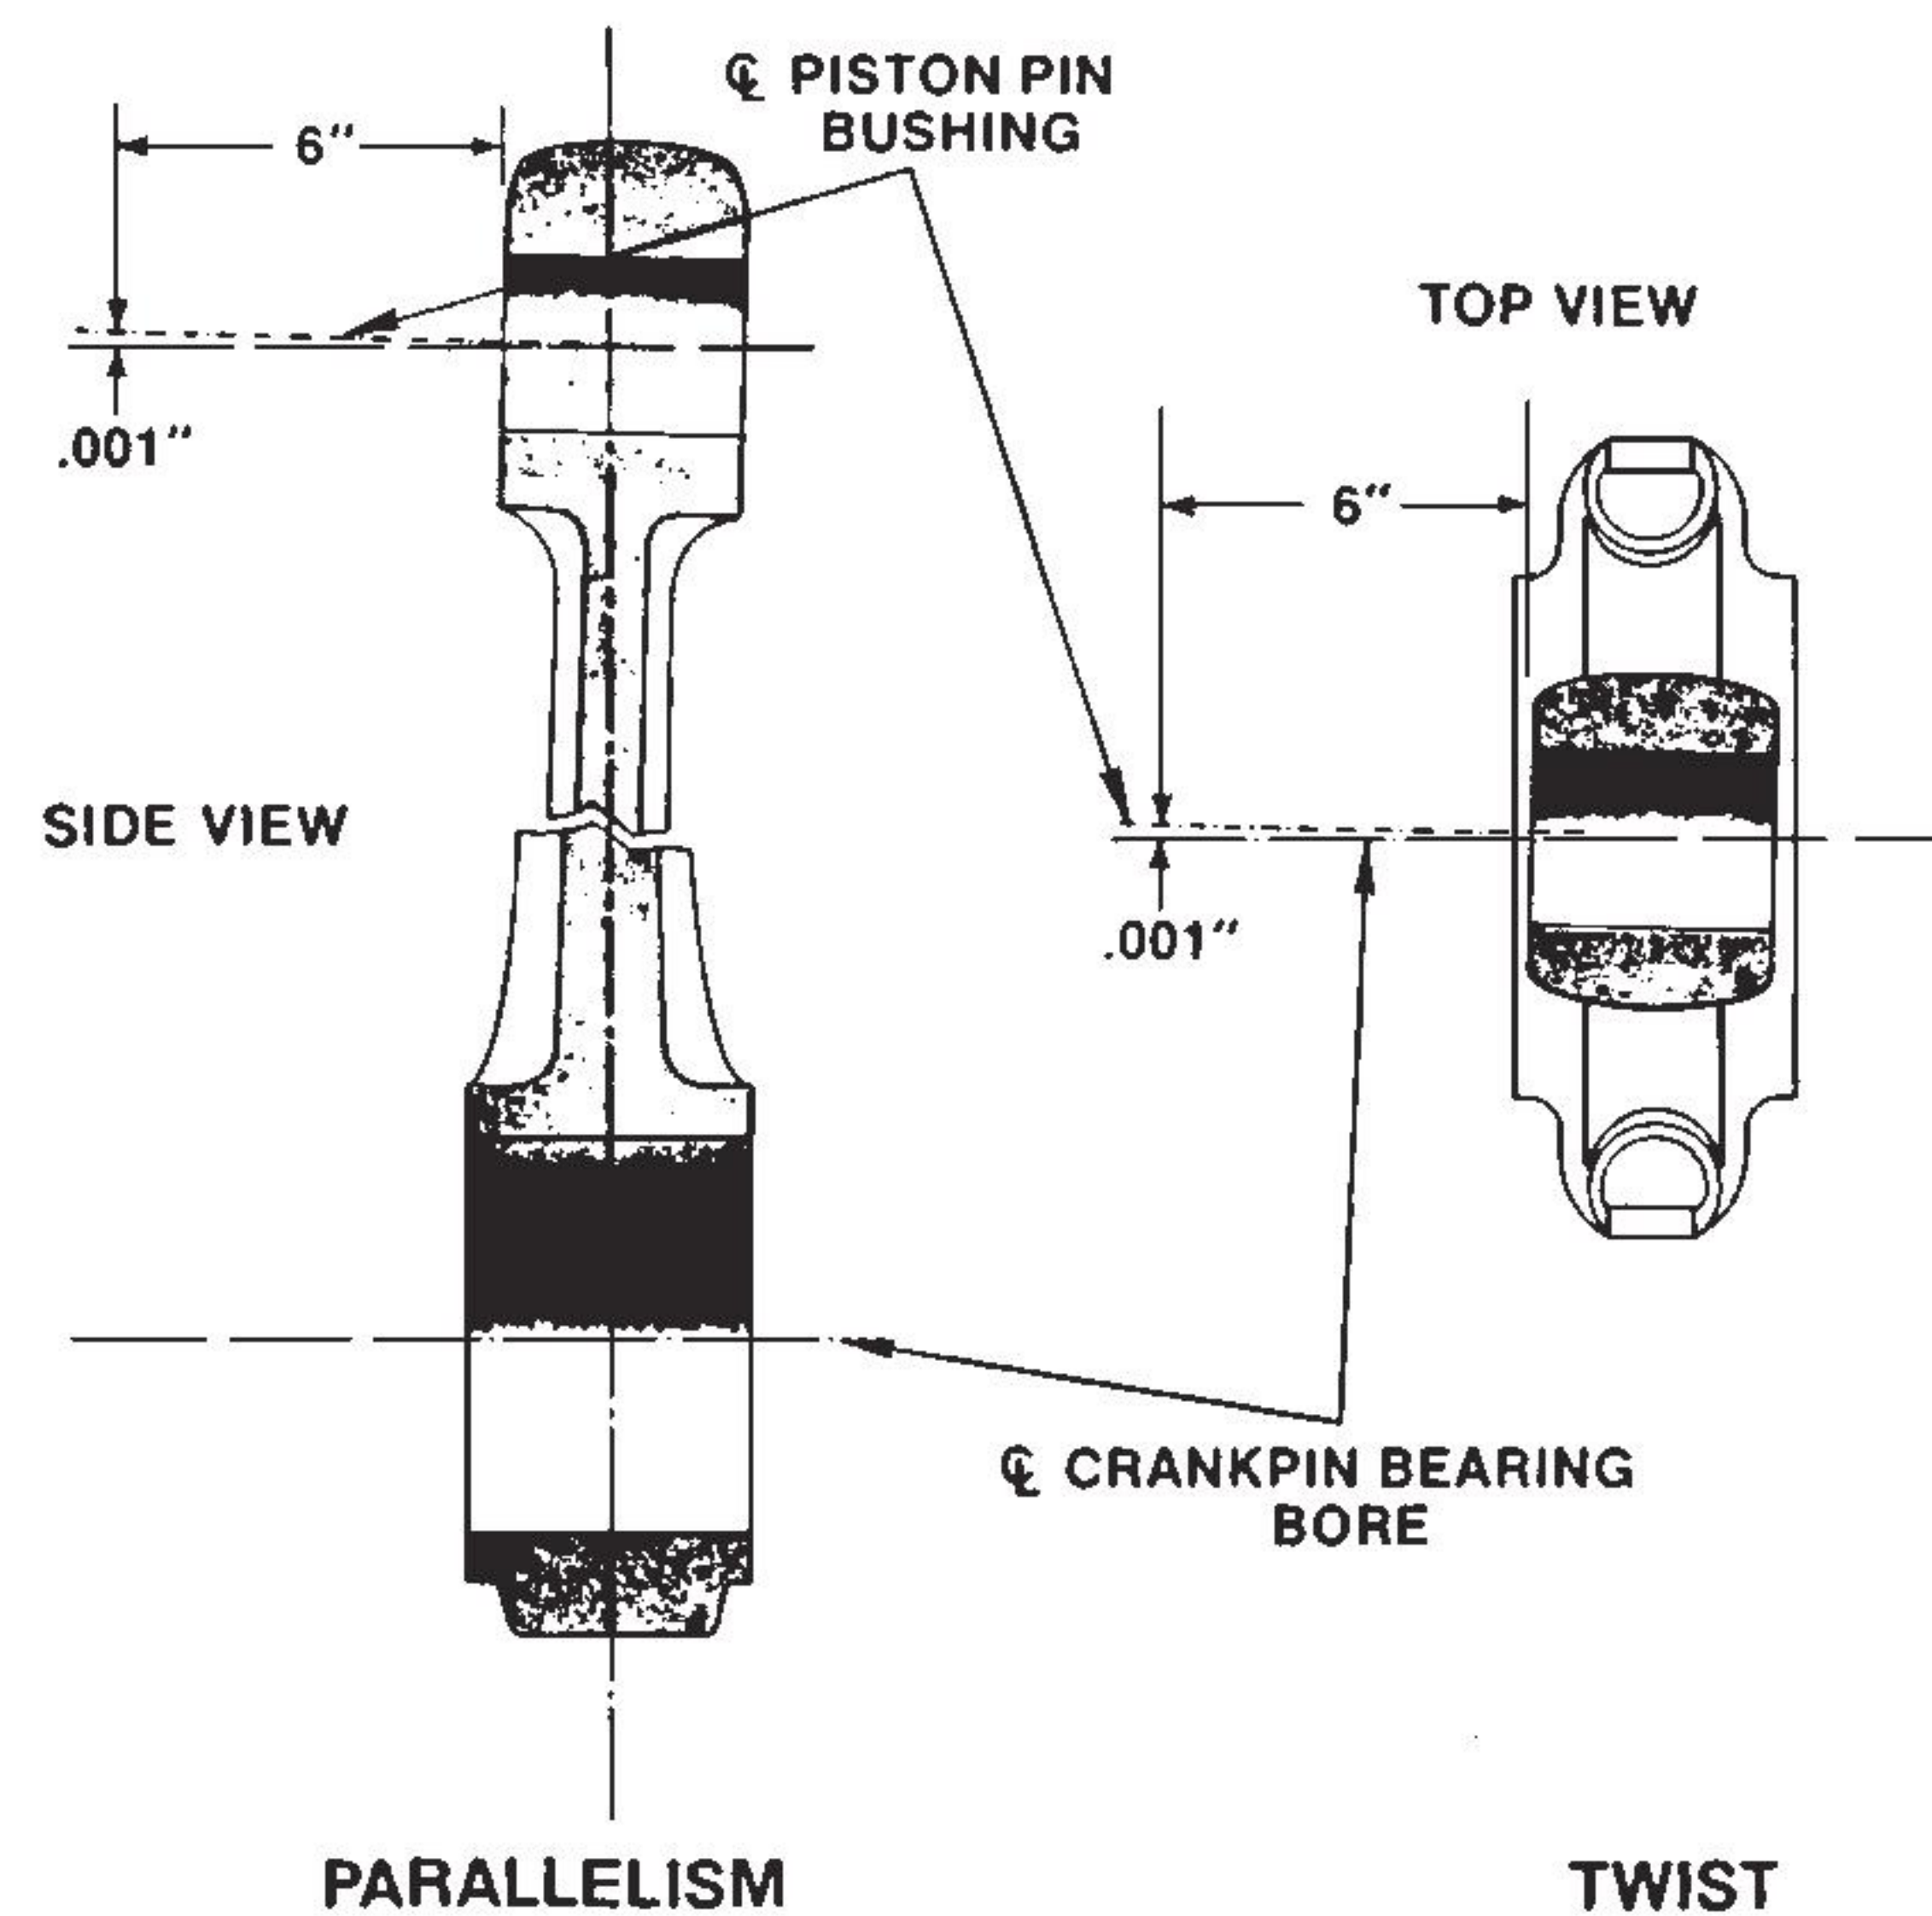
Connecting-rod parallelism and twist should be checked prior to reassembly with new bearings.
